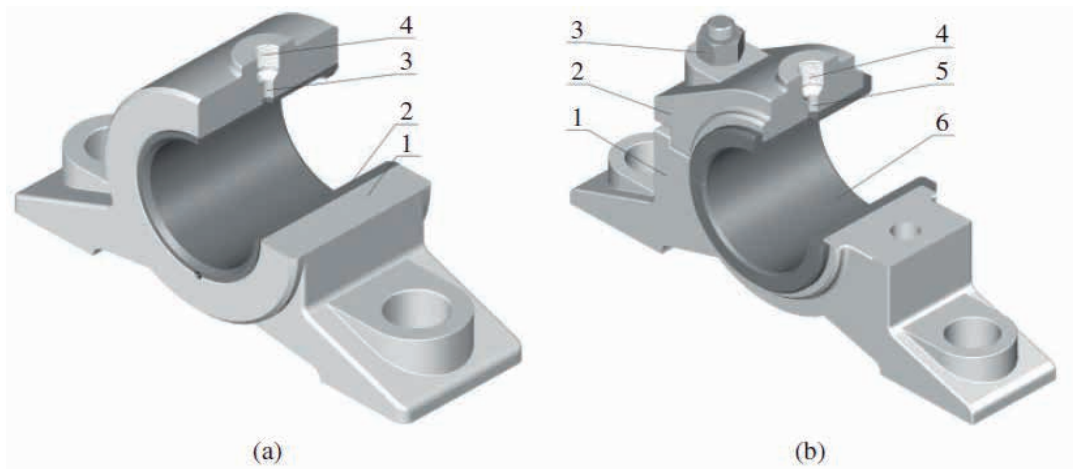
Structures of sliding bearings: (a) 1 housing, 2 bushing, 3 oil hole and 4 screw; (b) 1 housing, 2 housing cover, 3 stud, 4 screw, 5 oil hole and 6 liner or bushing (JIANG, 2019)
